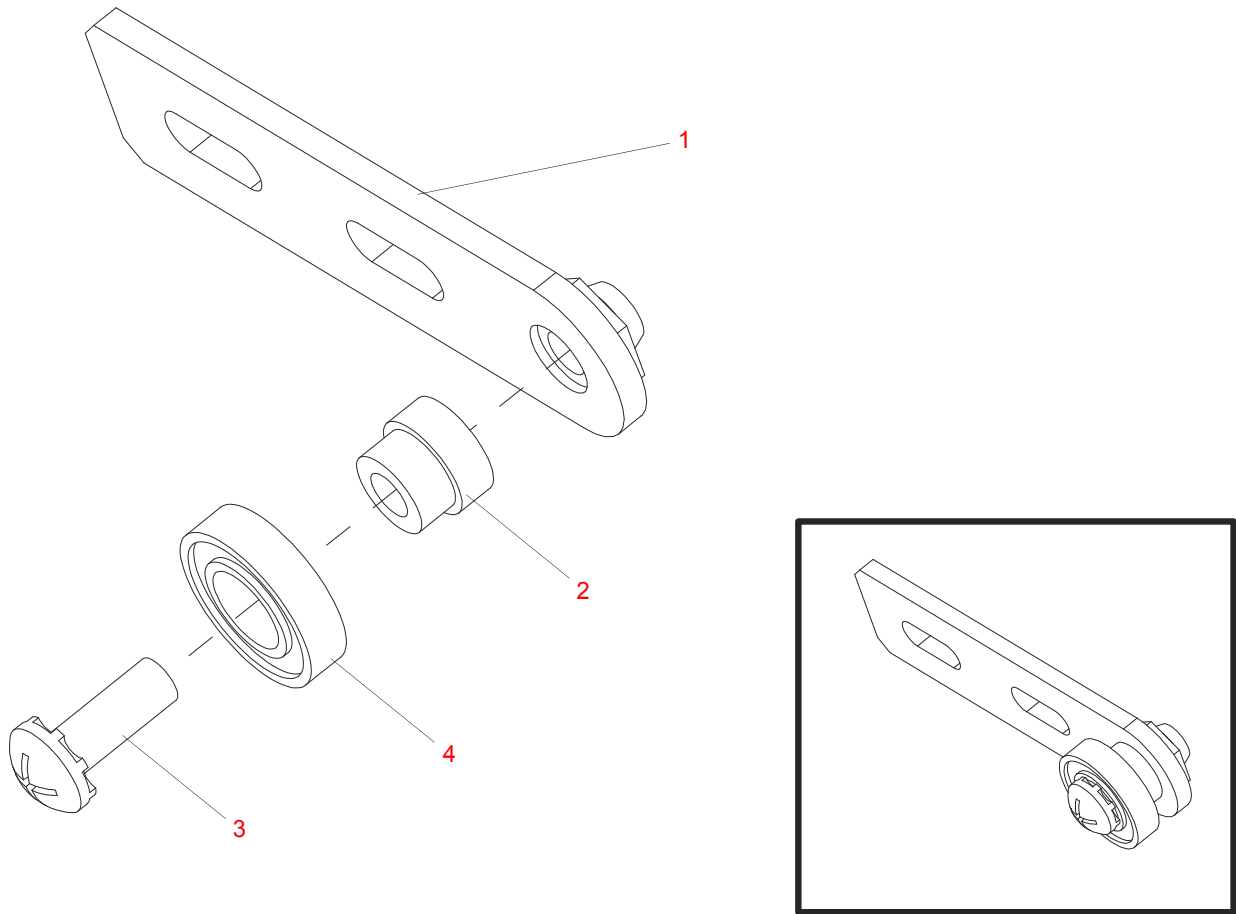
Shutter Rotate Adjustable Roller Arm Assembly
